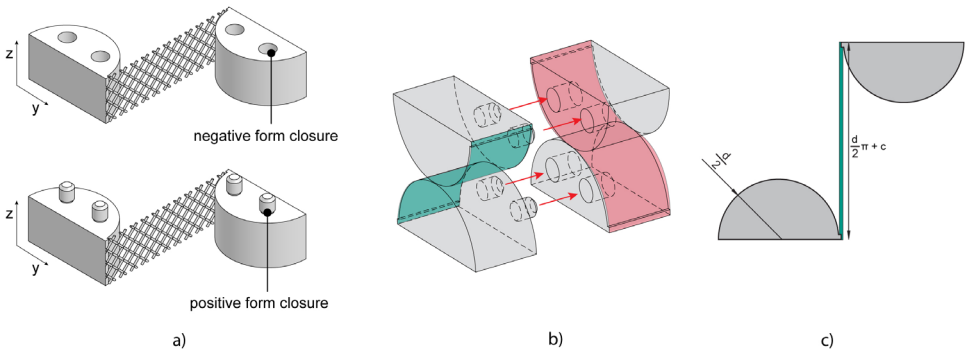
Design of the rolling contact joint in its unfolded configuration. a) CAD model of the two joints showing the positive and negative form closure. b) Assembly of the positive and negative part. c) Side view of the joint with parameters, in which d is the diameter of the joint, t is the thickness of the lattice, and c is a clearance.
